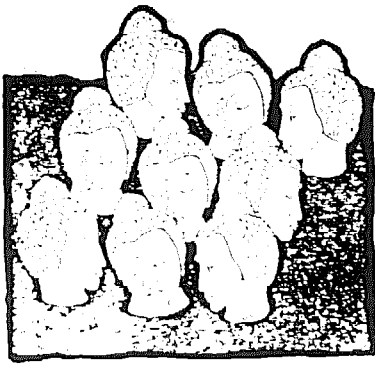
Identical hollow wax patterns produced in the rubber master mould.
